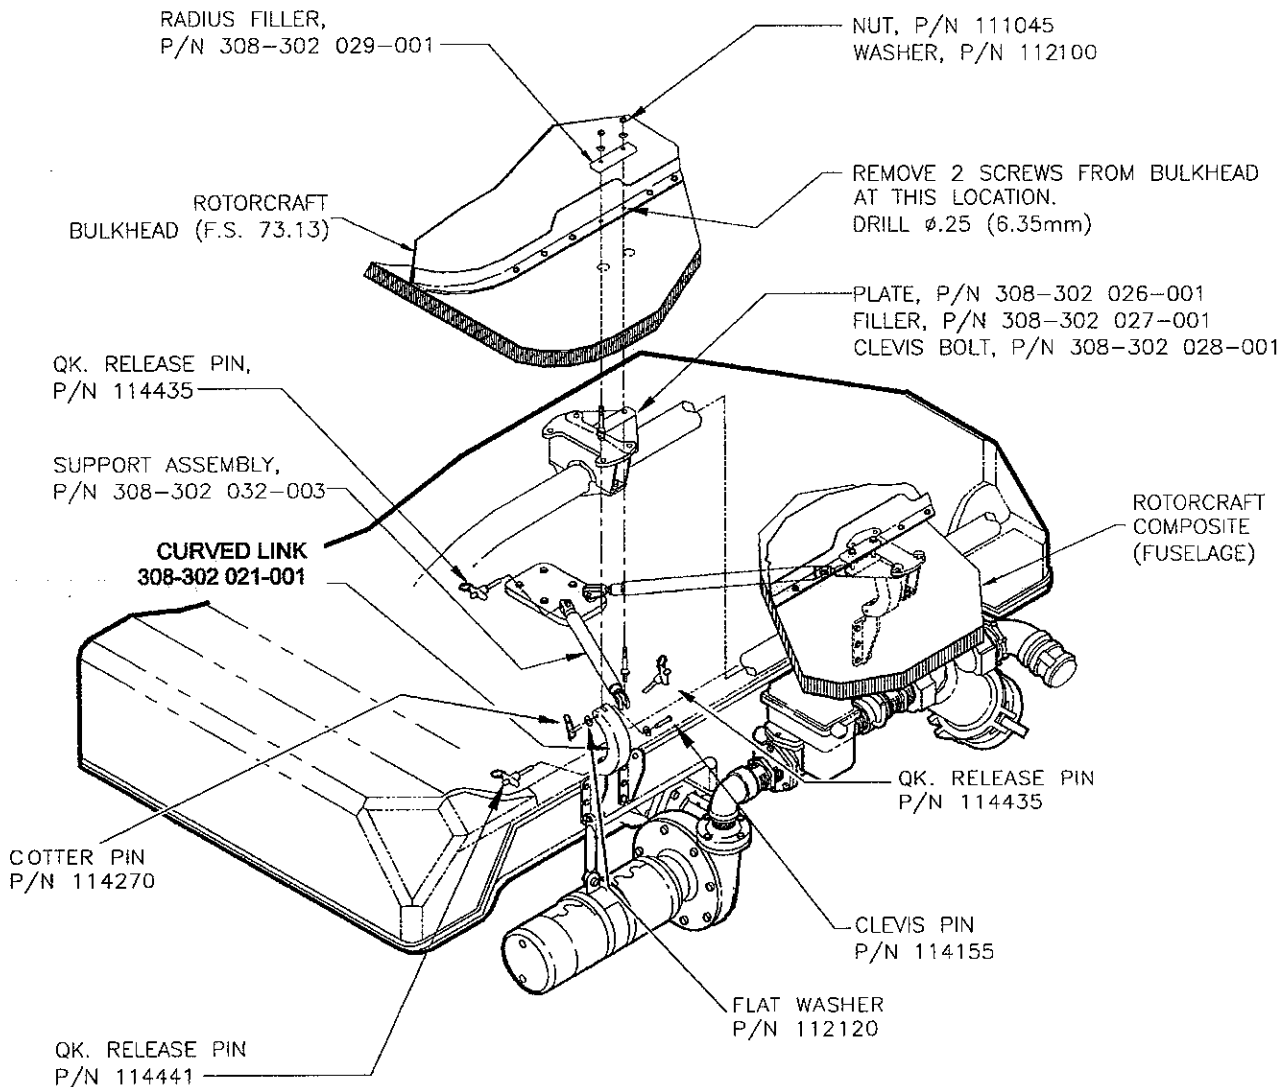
(Sheet 1 of 2), Forward Attachment Fitting Installation (Bell Gear)
